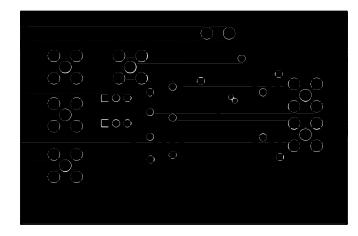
EVAL-ADN469xEHDEBZ Solder Side
